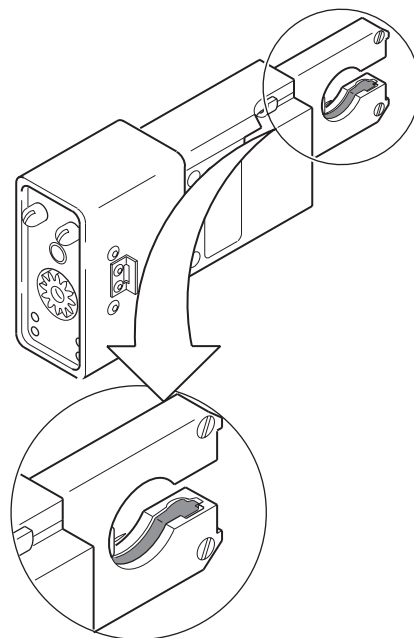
Inspect Exposed Surfaces of the Weld Head
